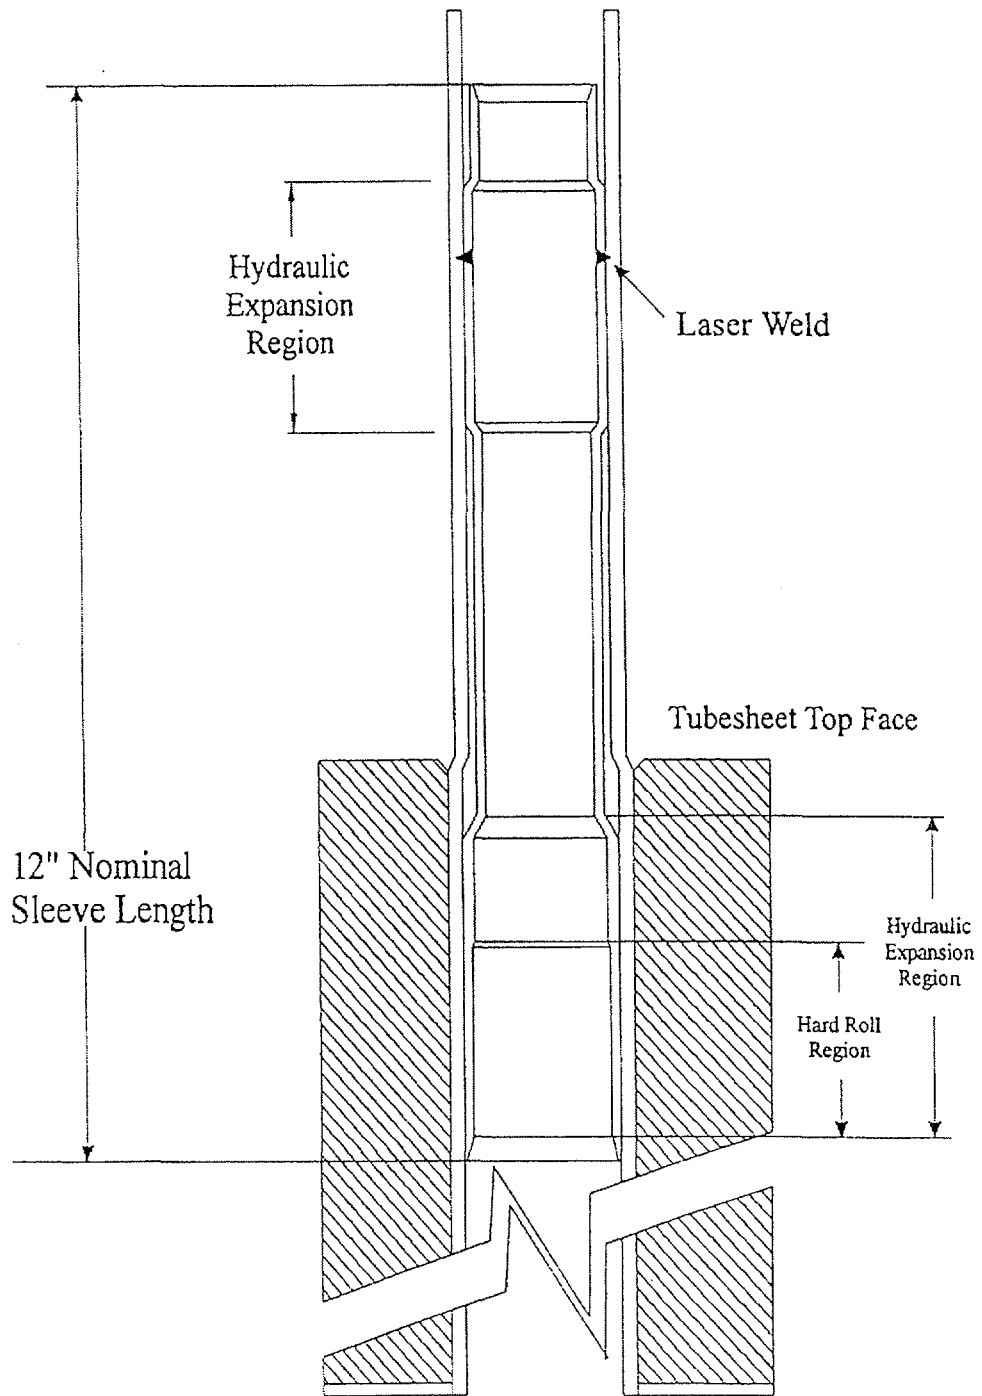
Westinghouse Laser Welded Elevated Tubesheet Sleeve Installation.
